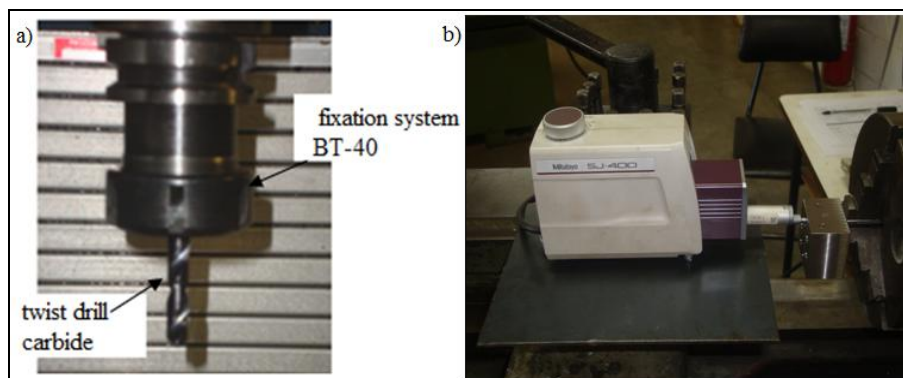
a) Mounting the precision collet holders BT-40 with the drill; b) Rugosimeter Surftest SJ-400 Mitutoyo
